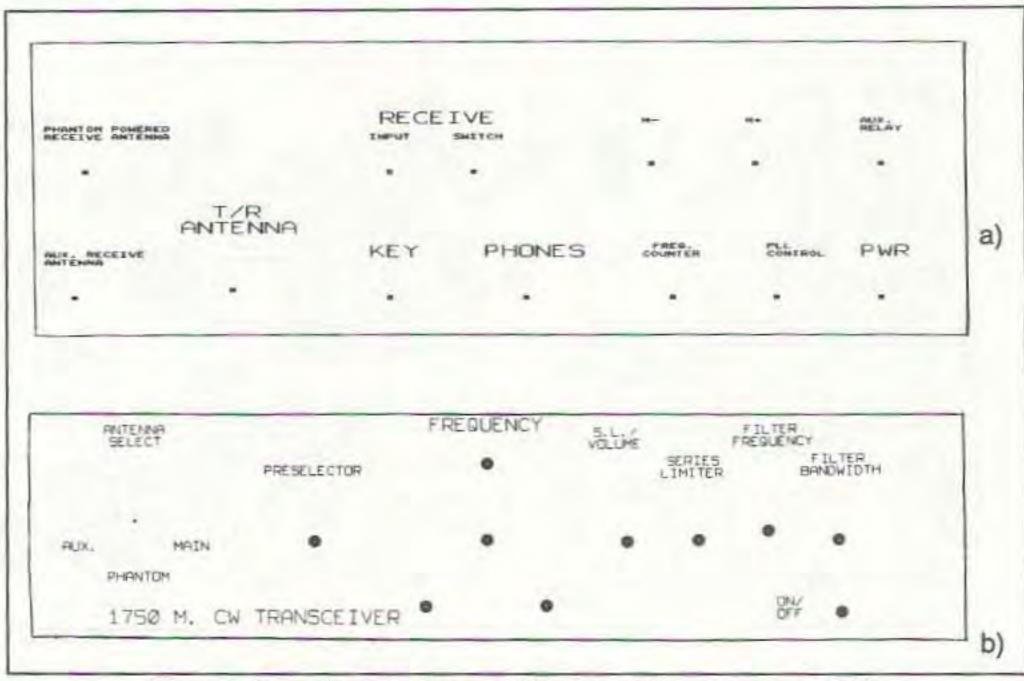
Face plate templates: (a) front, and (b) rear, reduced 50%.
